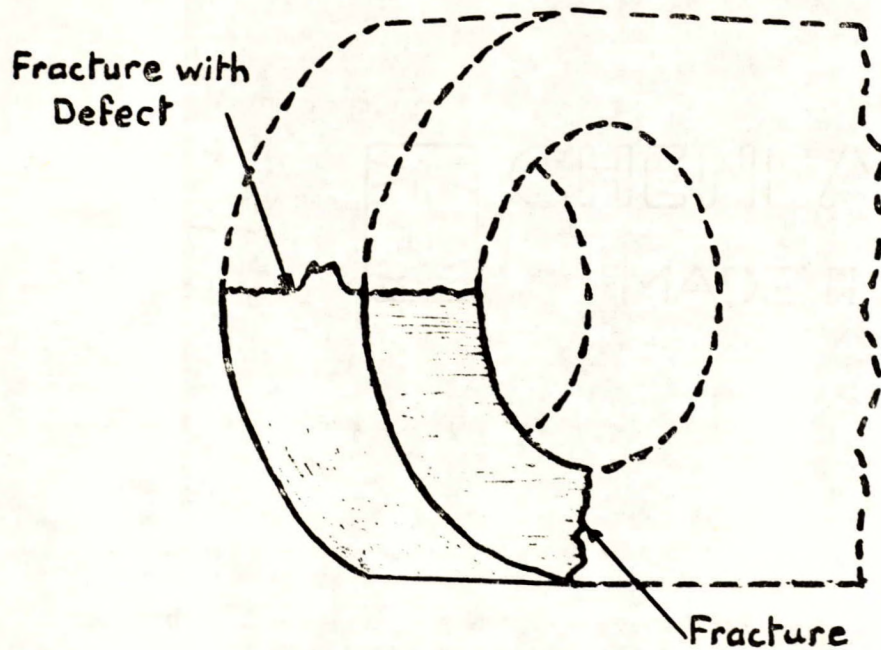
Sketch showing position of fractured sample in end of component. The fracture shown at the bottom may have been at the top.
